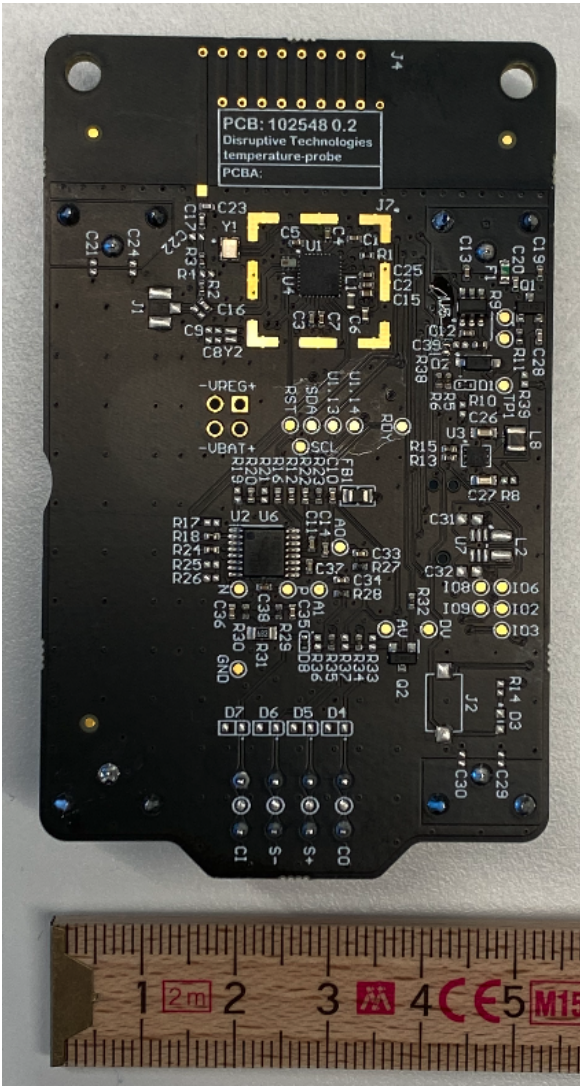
Picture of the component side of the assembled PCB inside 102774 - Temperature Probe Sensor US.
